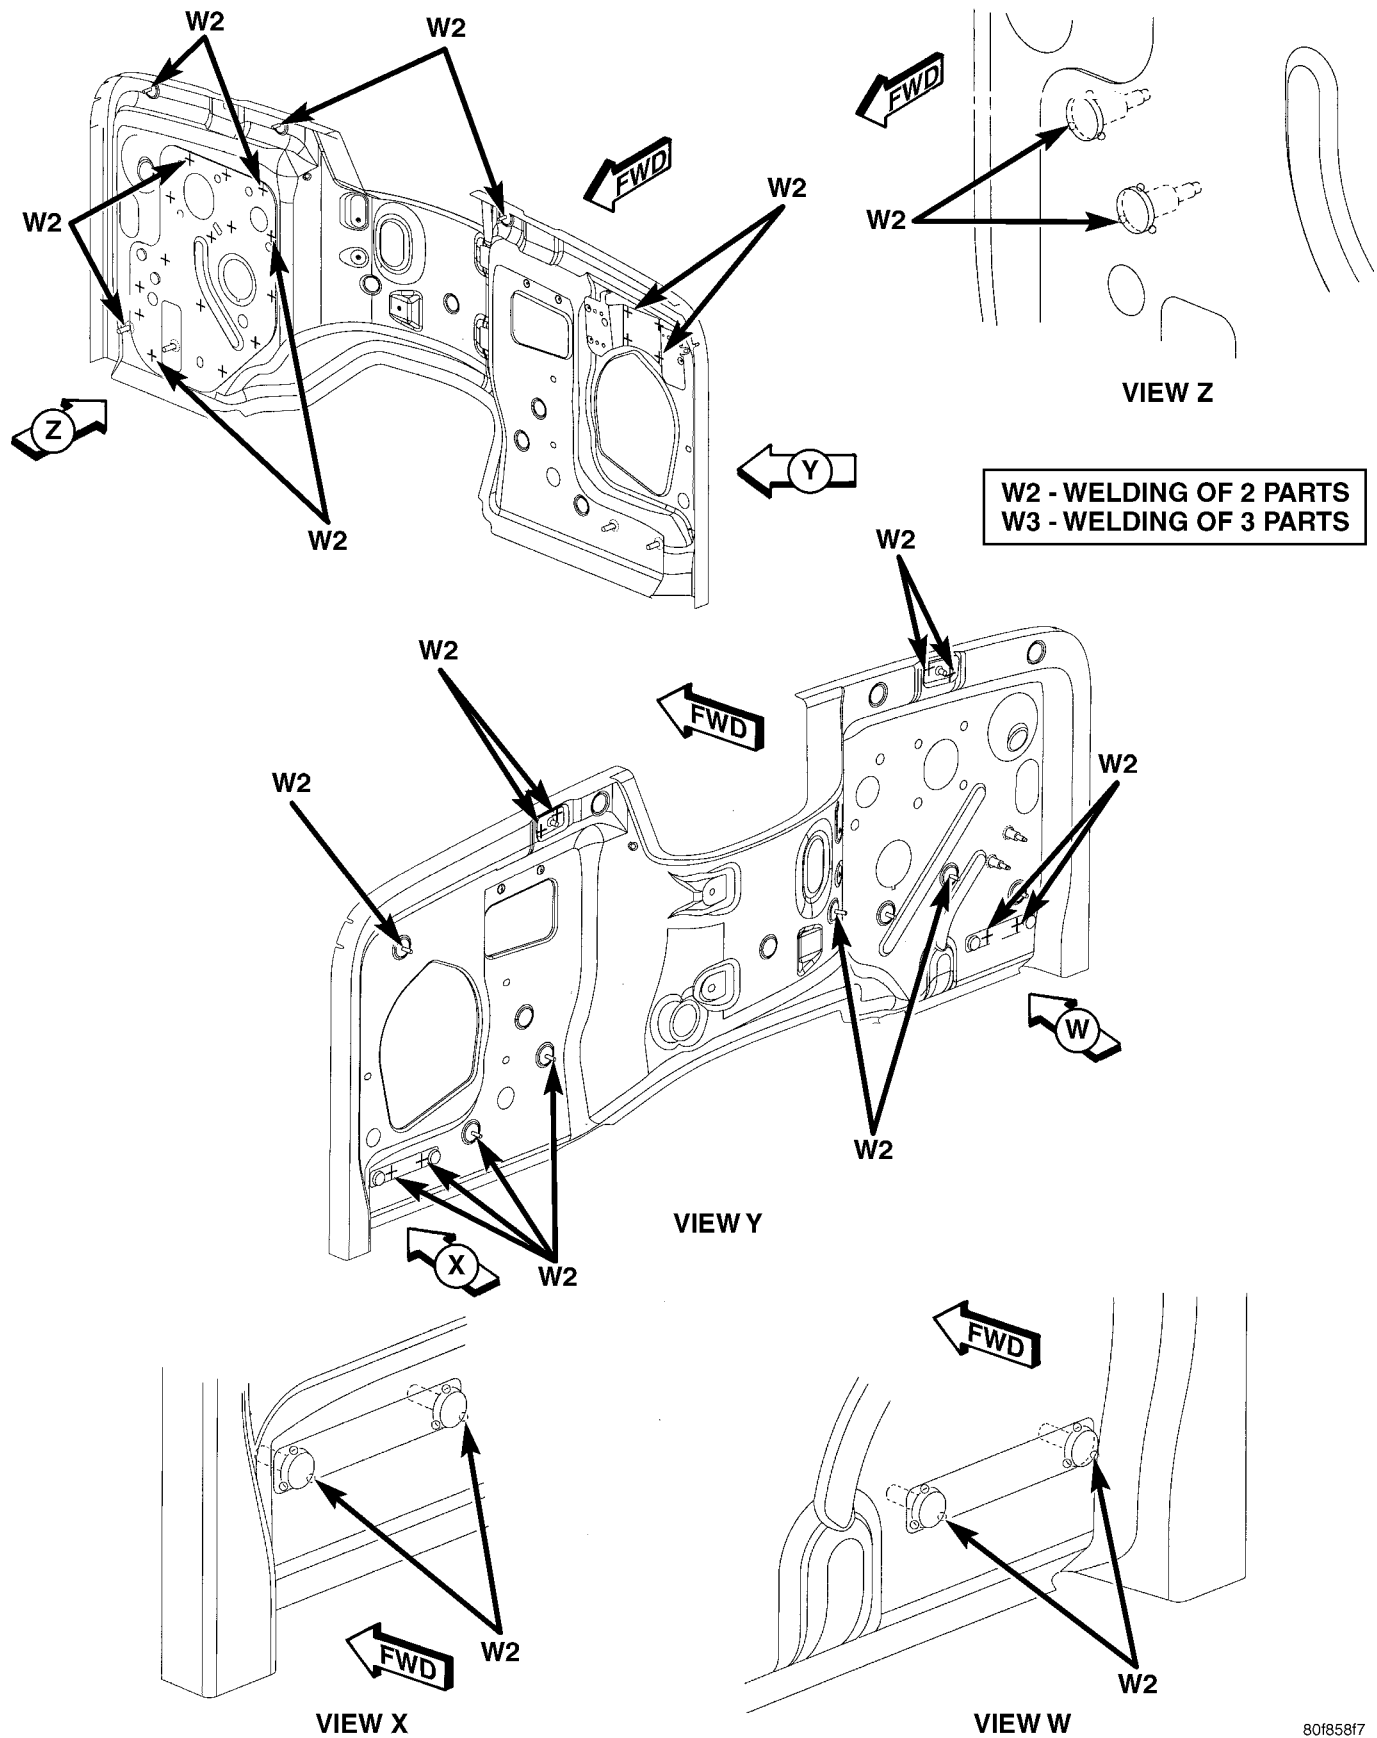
DASH PANEL - RIGHT HAND DRIVE
